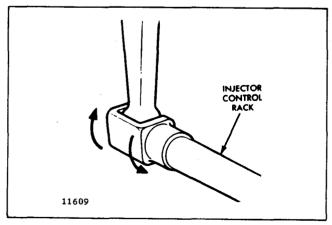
Checking Rotating Movement of Injector Control Rack
